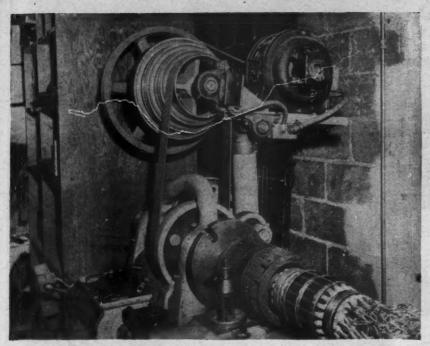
Compact pivot drive for shop lathe is so designed that weight of motor portion provides necessary tension on belt between jack shaft and lathe. Pushbutton on jack shaft support is for normal operation.
